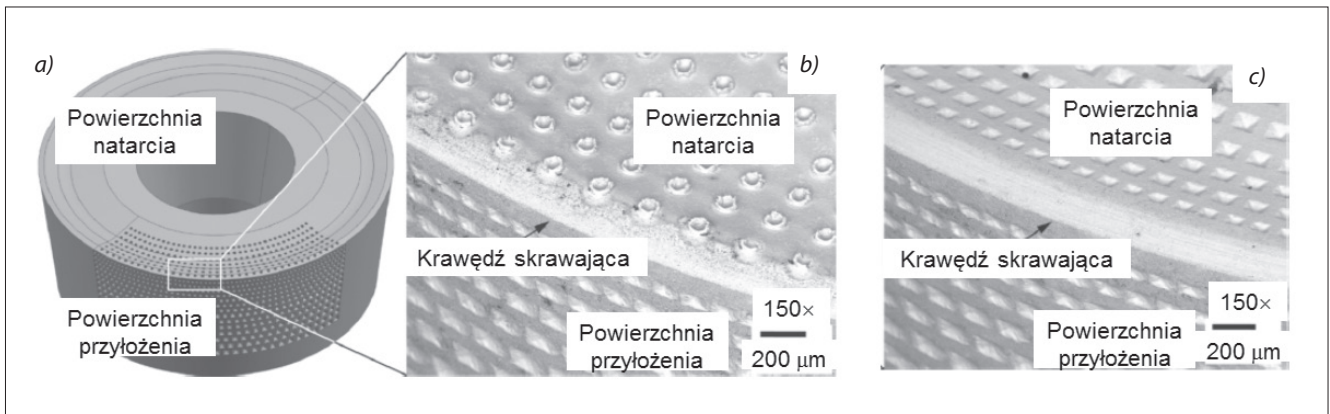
Example of combined micro-texture fabricated on rake and flank faces of round cutting insert using laser method: a) view of textures on the insert, b) and c) SEM images of grooves [11]
